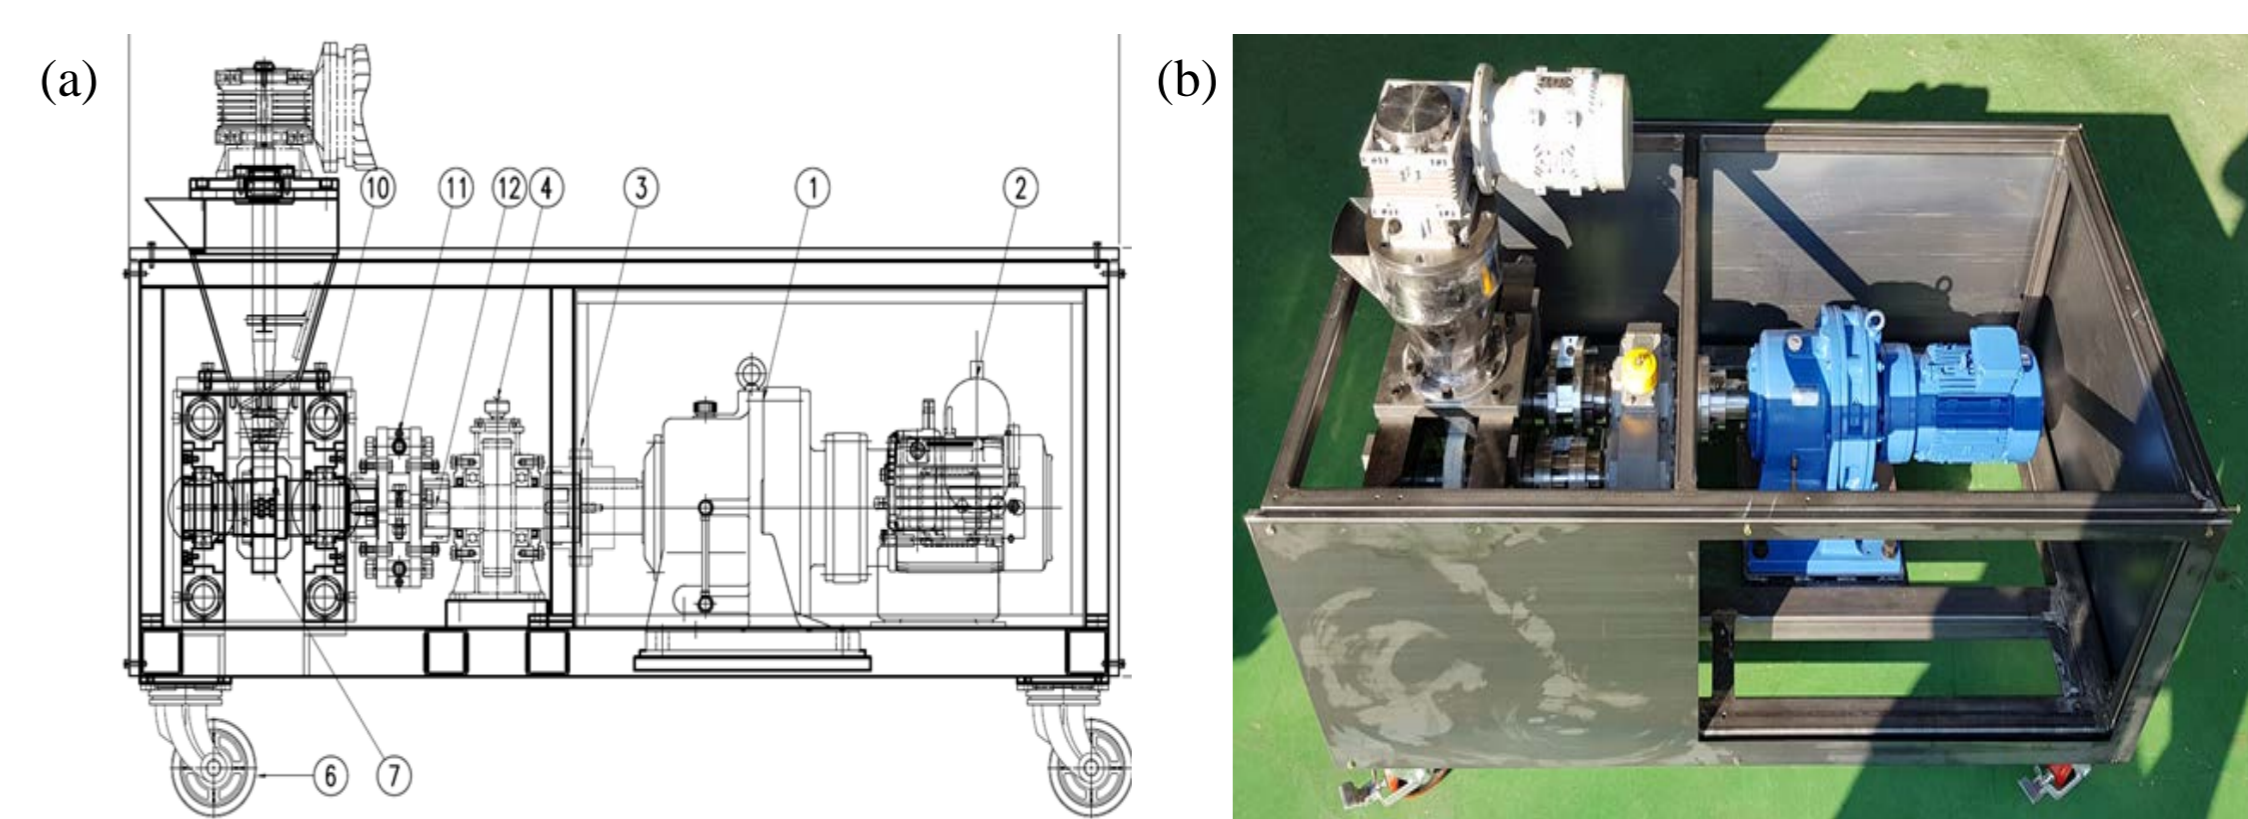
(a) Design drawing of device, (b) Appearance of device.
